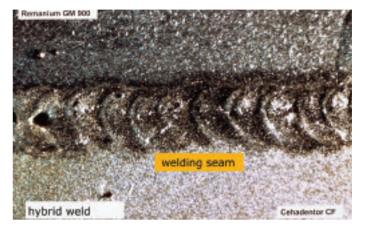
Macroscopic view of the welding seam of a "hybrid weld" between a non-precious CoCr alloy (Remanium GM 900) and a precious alloy (Cehadentor CF).
